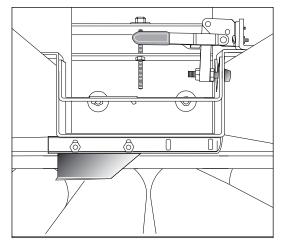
Tools G (#5) and A (#8) must press firmly on the cutting roller.
